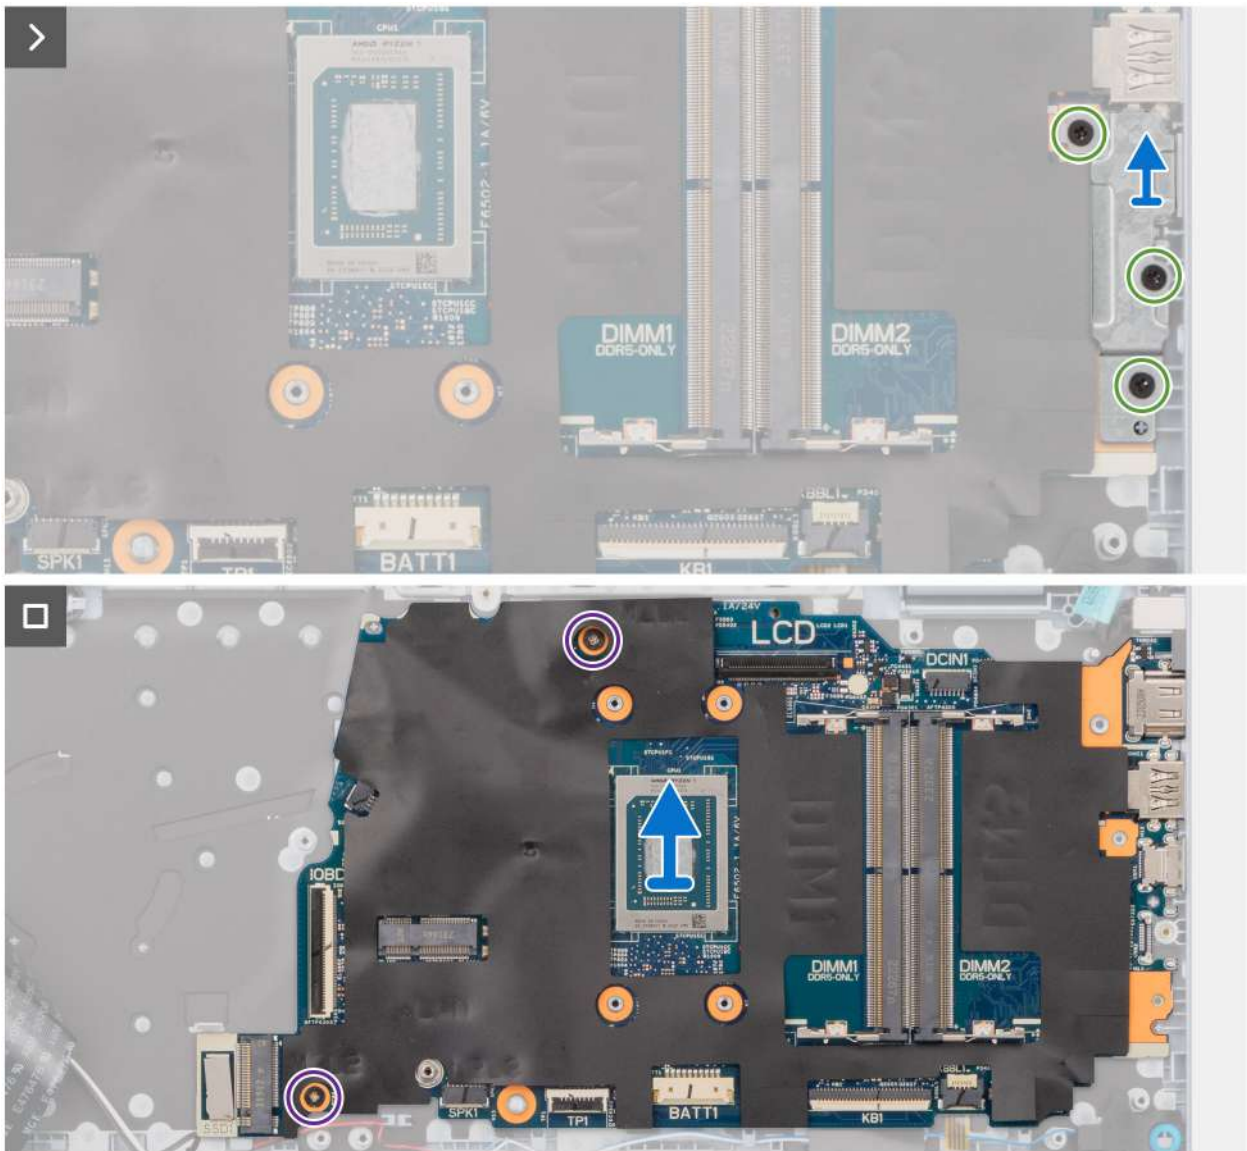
Removing the system board (for computers shipped with a plastic chassis)
